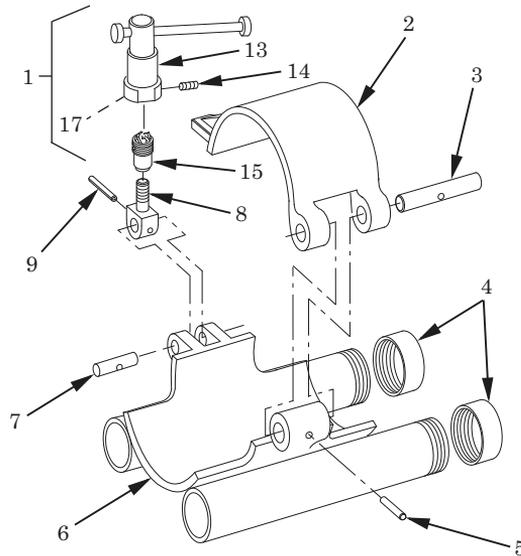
Assembly of Buffer Housing Assembly and Clamp Handle Assembly.
